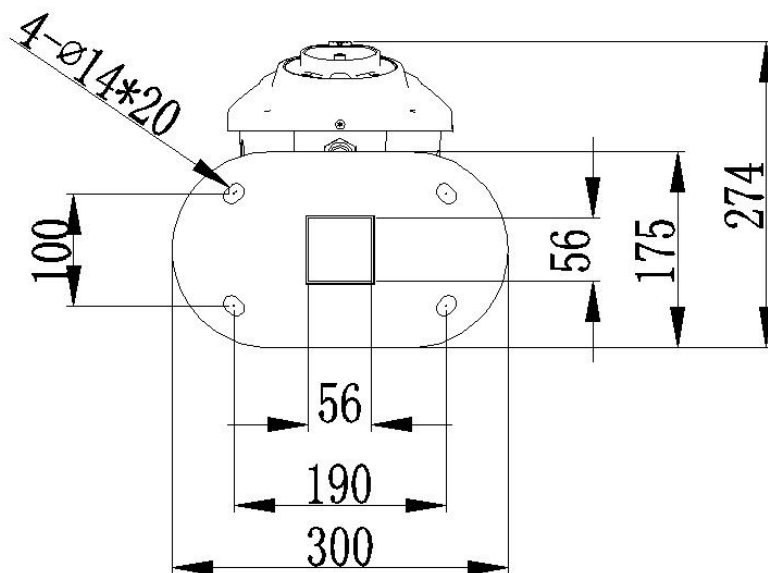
Hole Location of Column Base (Unit: mm)
